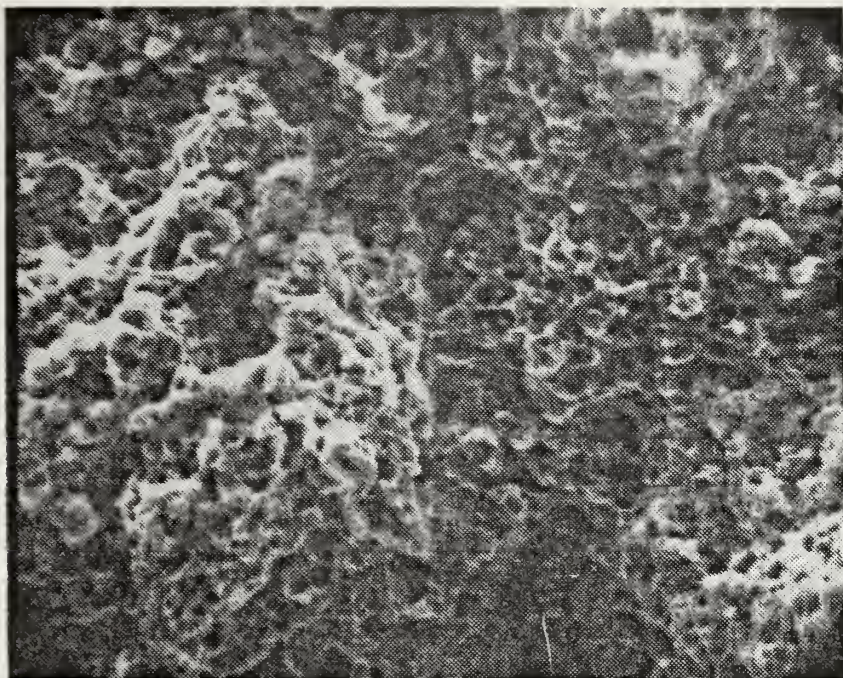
Higher magnification of Fig. 12 fractograph (specimen RI-2), showing an area composed of equiaxed dimples. X2000.
